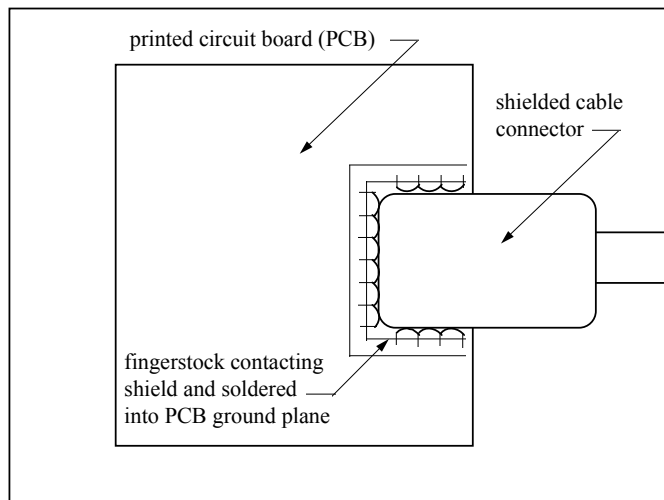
Fingerstock approach toward shield termination of a PCB mount connector
